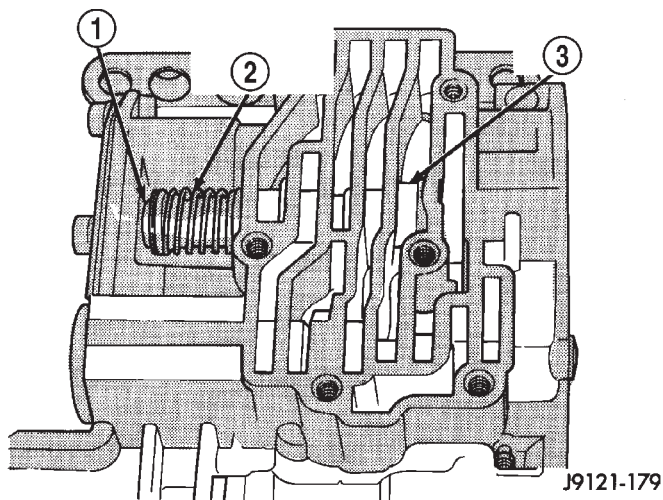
Shuttle Valve E-Clip And Secondary Spring
